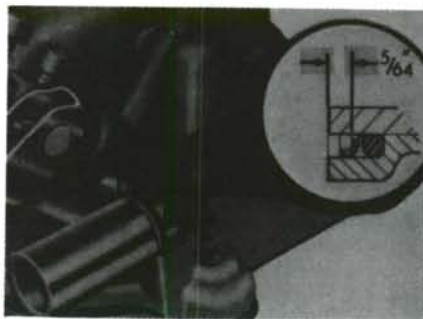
Some early McCulloch "W" series carburetors have a seal cup which must be installed 5/64 inch (1.98 mm) inside primer bore as shown above.
